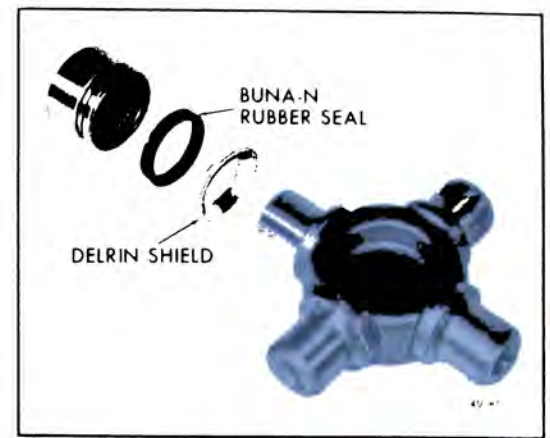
Improved Universal Joint carefully to avoid jamming or bending any of the parts.
